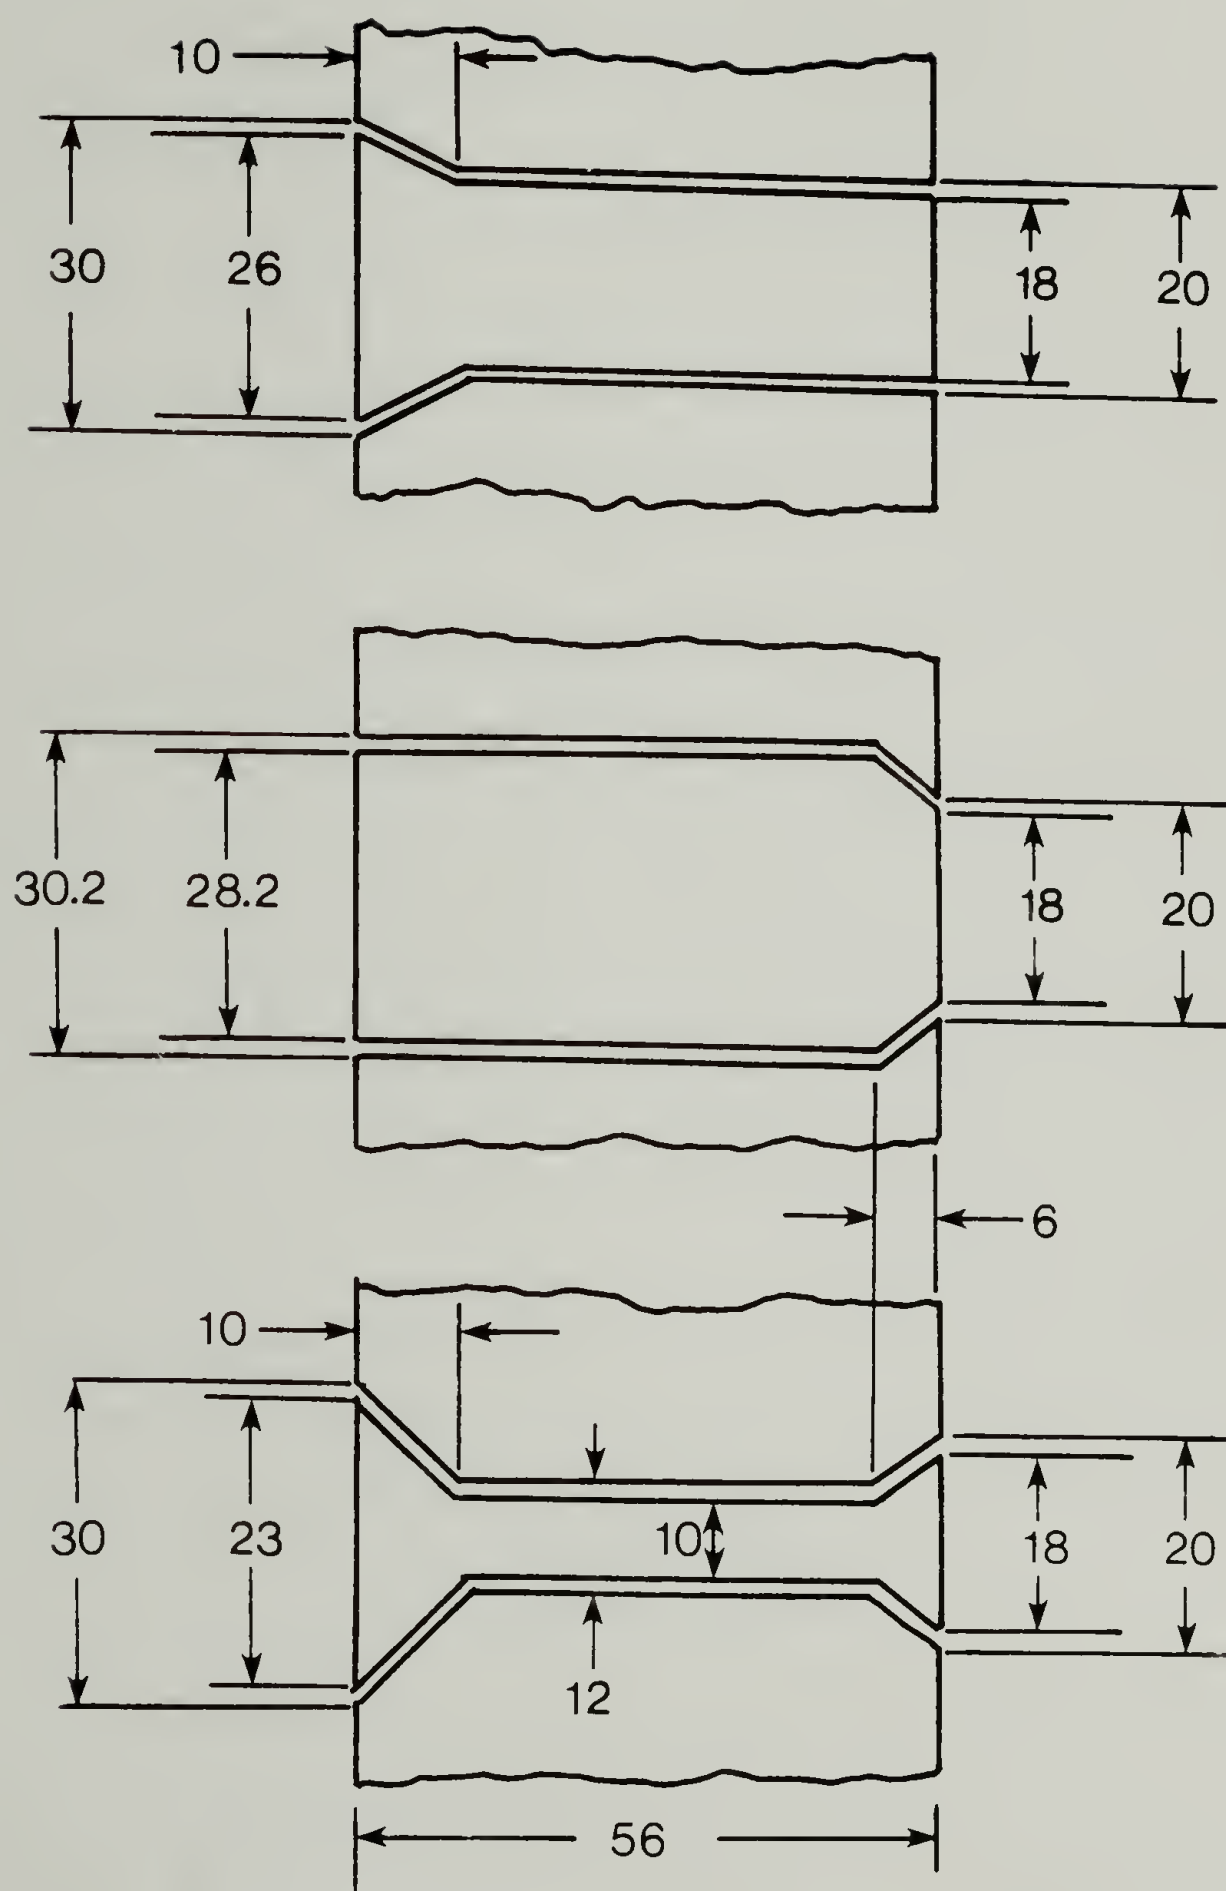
Dimensions of annular extrusion dies used in flow experiments. All dimensions are in mm.
